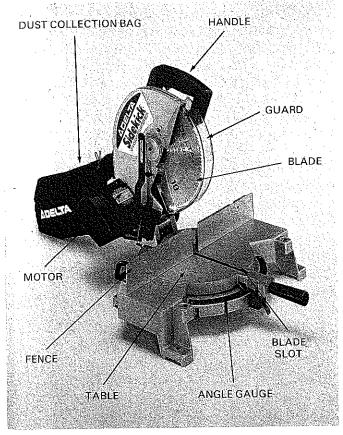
Parts of a power miter saw. (Delta International Machinery Corp.)
